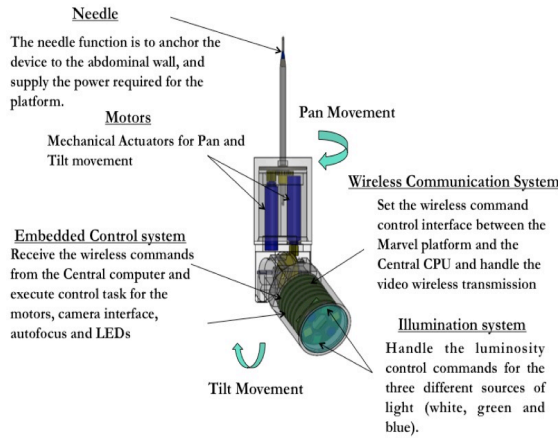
CAD design exploded view of the internal configuration of the *MARVEL* CM.
